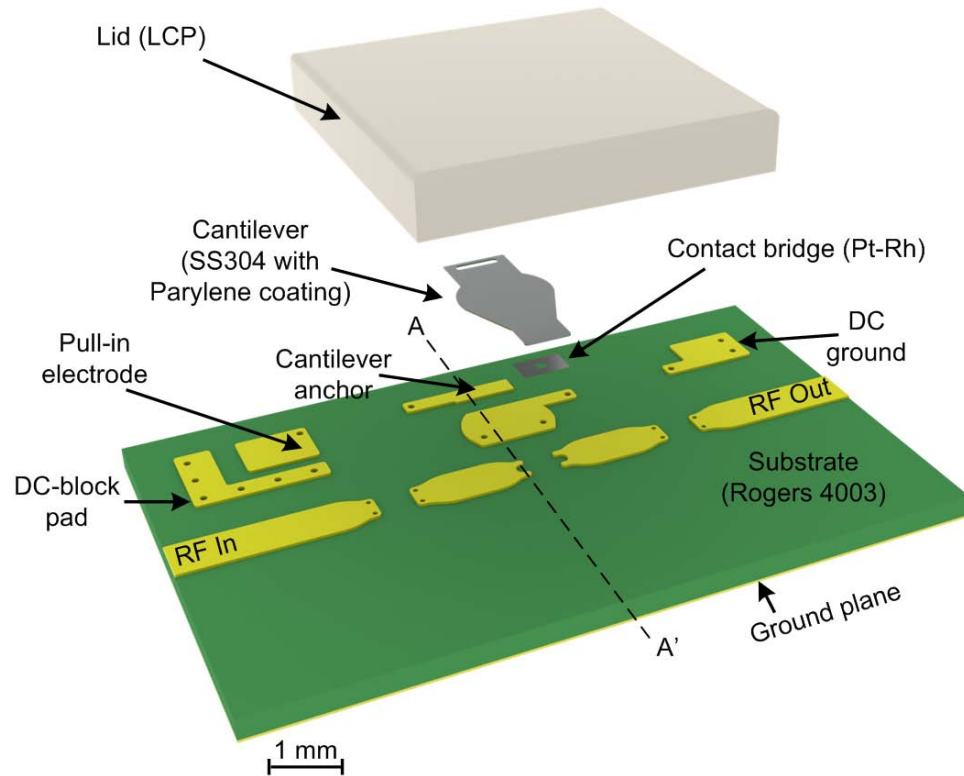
Exploded view of the single packaged micro-relay. Pt-Rh contact bridge is placed at the tip of the Parylene coated steel cantilever. The assembly is then mounted on a three-layer PCB. An LCP based lid completes the package. Device footprint (as defined by the footprint of the cantilever) is  $8.4 \text{ mm}^2$ . A–A' cross section is shown in Figure 5.4.
